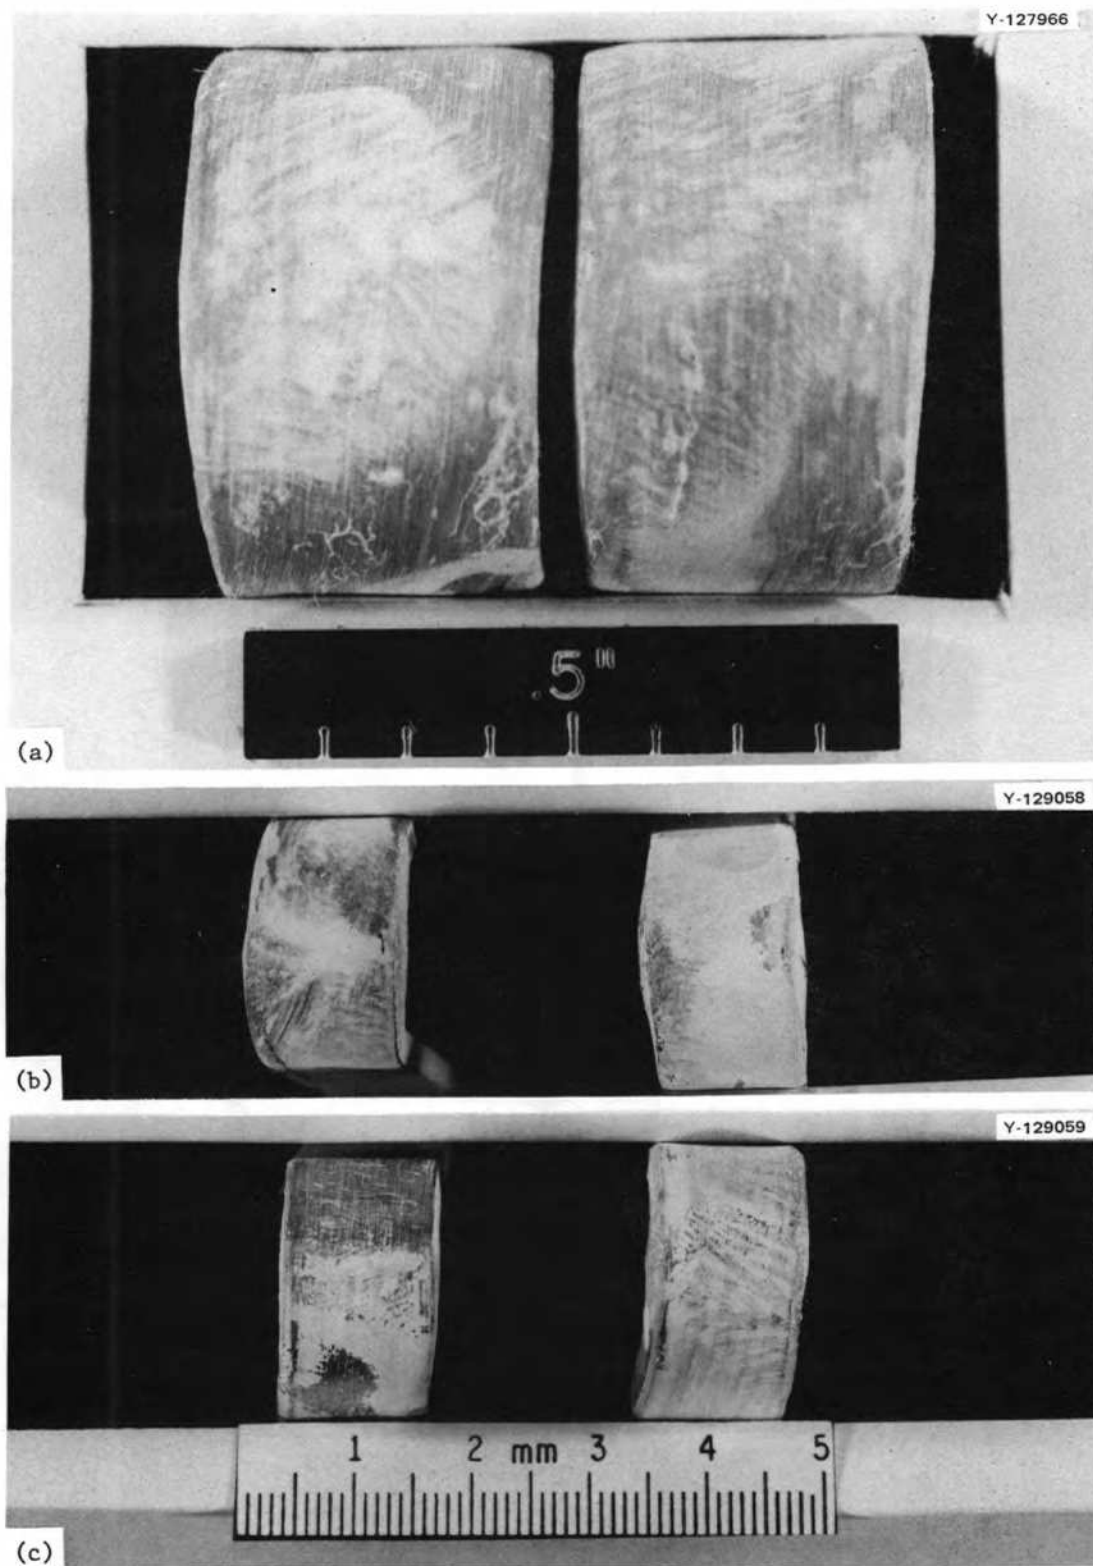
Photographs of the tension side or side-bend specimens of modified Hastelloy N. Dye penetrant has been applied. Dark spots indicate cracks. (a) Heat 74539. (b) Heat 74557. (c) Heat 74558. Reduced 11%.
